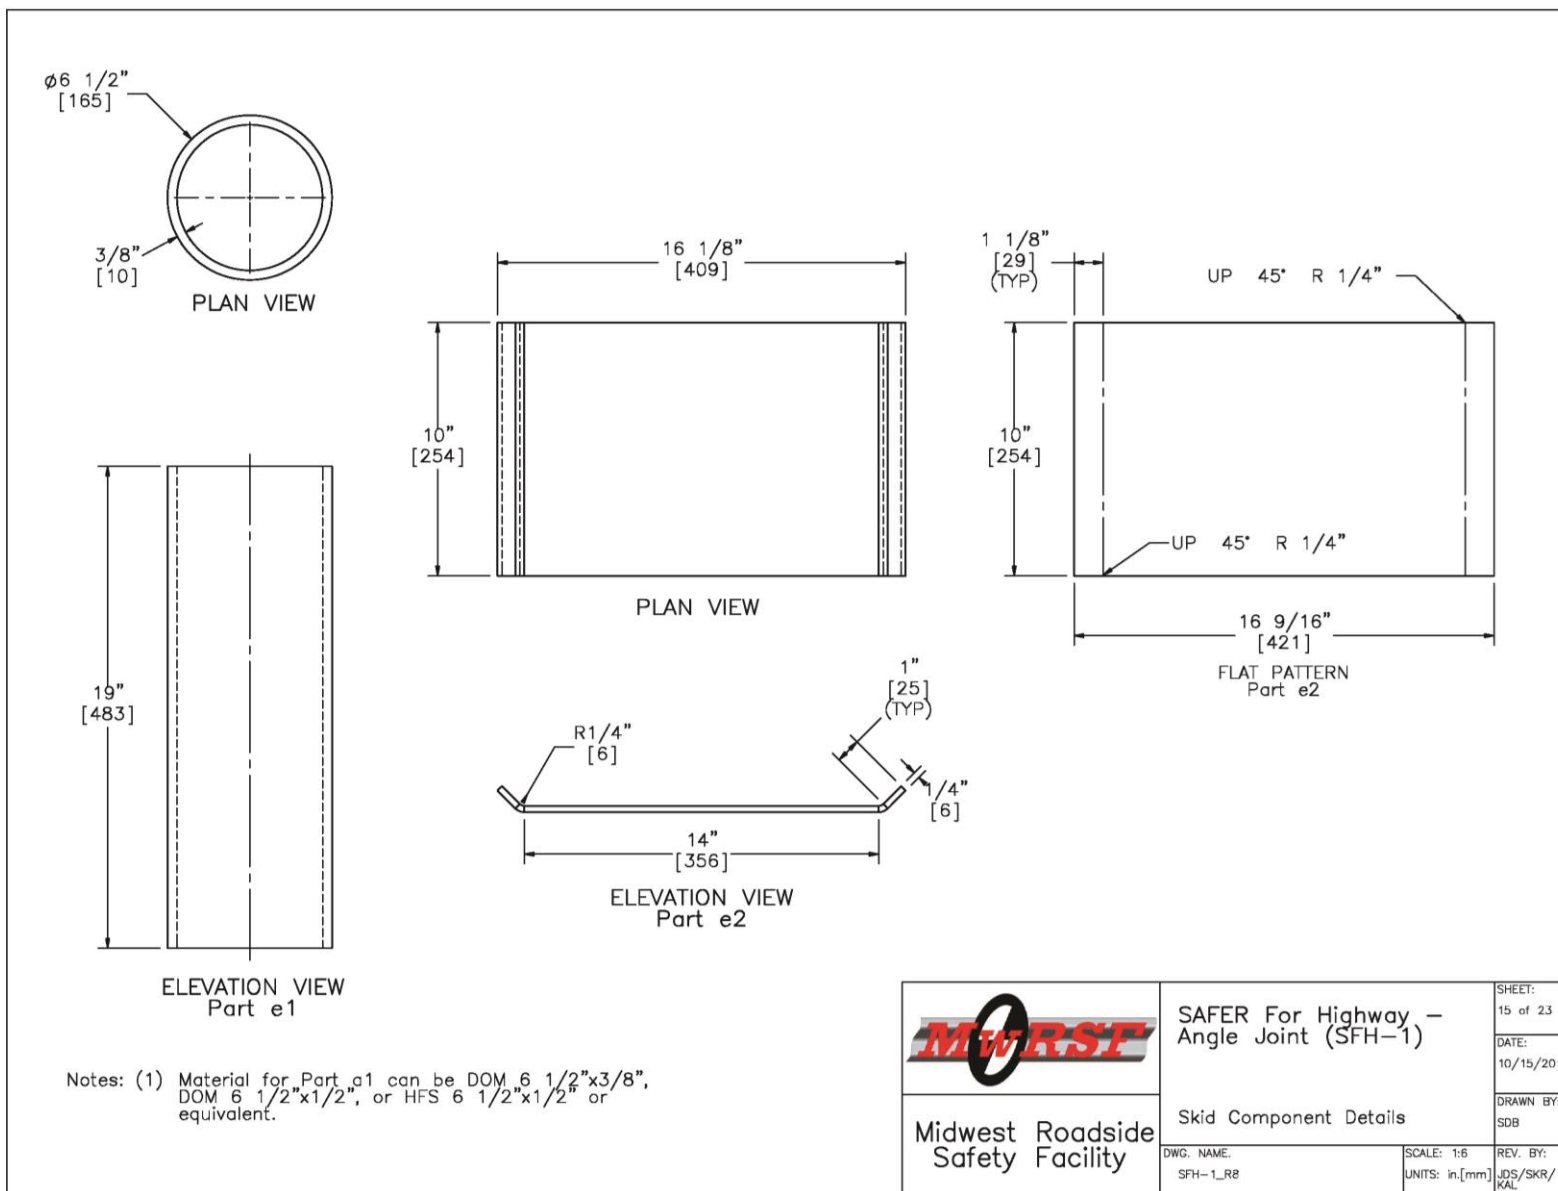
Recommended Barrier Design for Full-Scale Crash Testing, Skid Component Details
